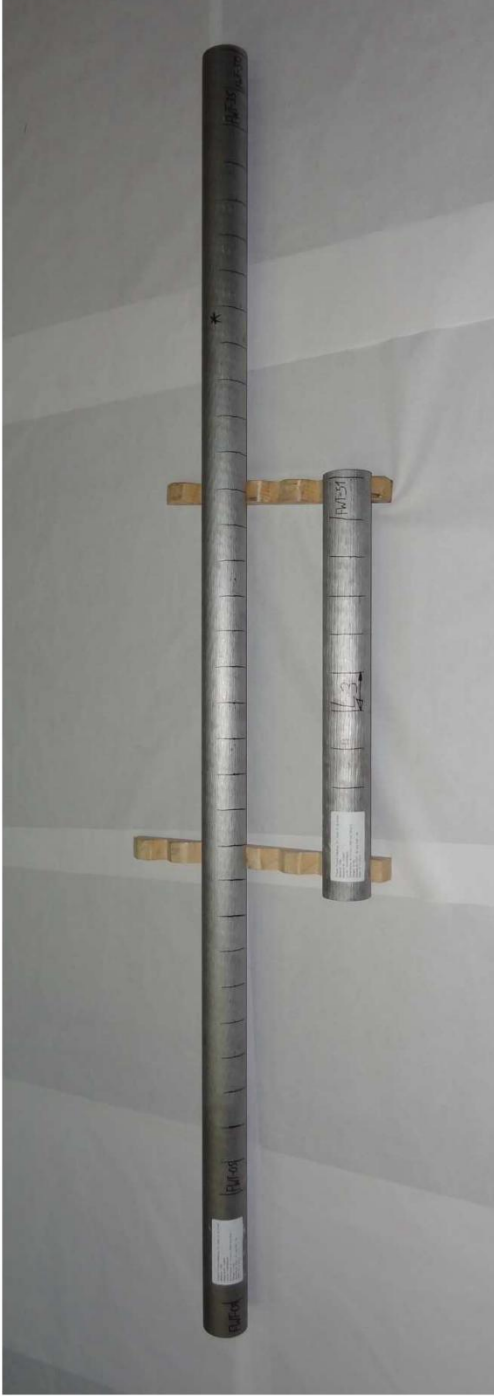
Photograph of forged TZM – rods prior to machining to final friction weld samples
